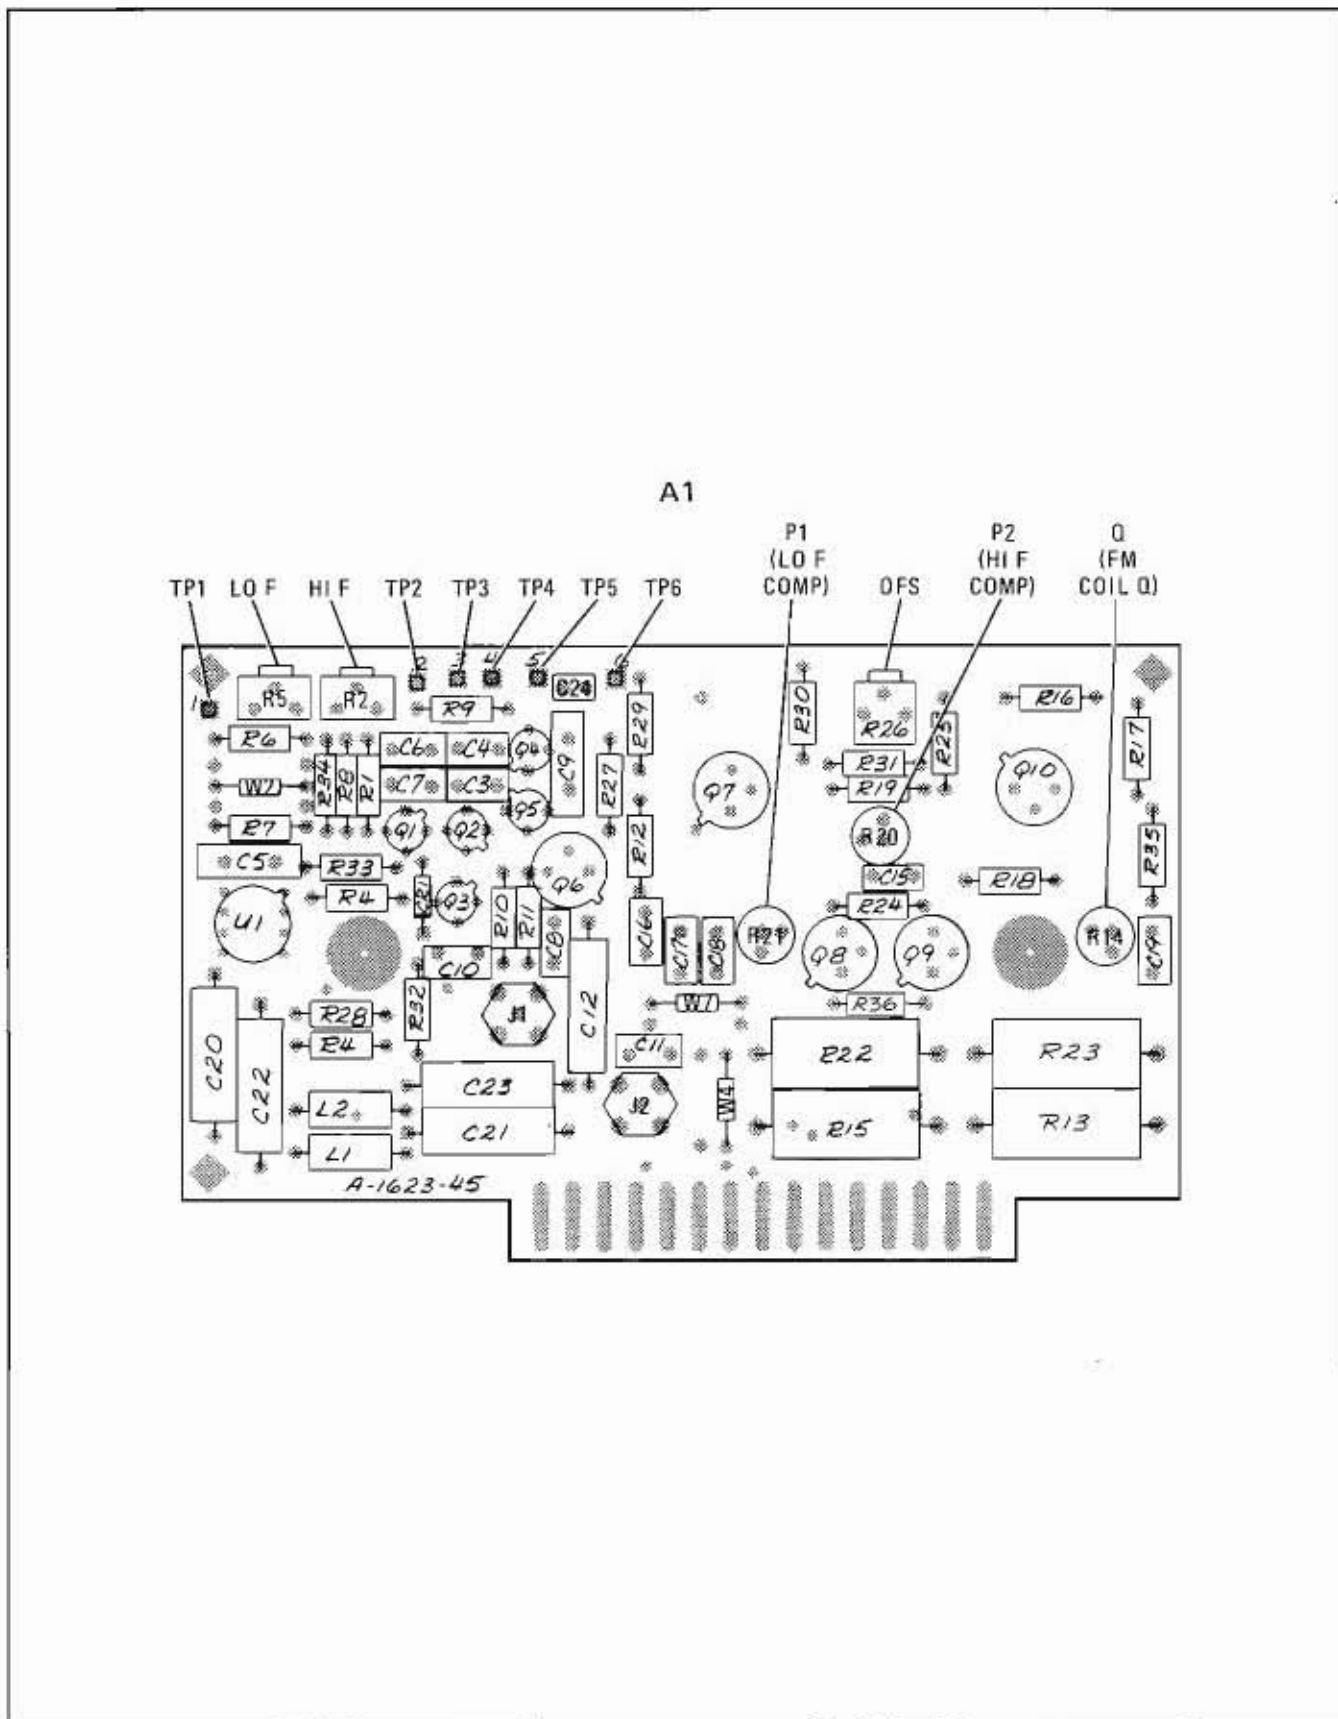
A1 FM Driver Assembly, Component Locations (Change A)
